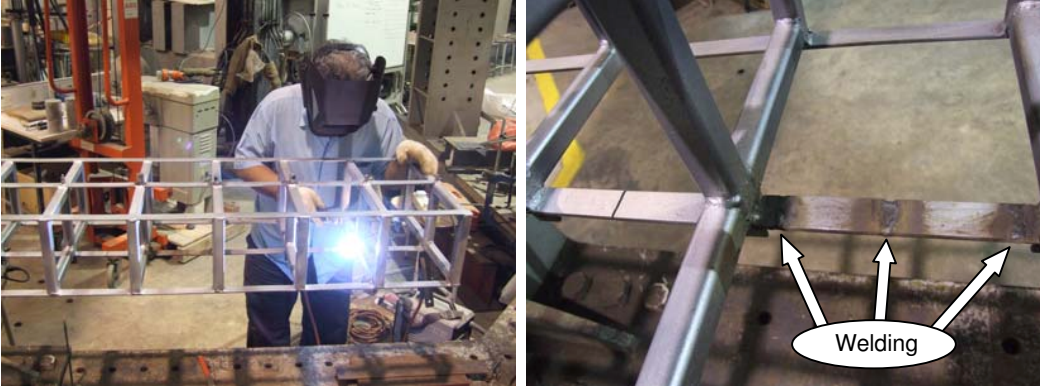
Welding at level 4, 6, and cut remained at level 3
